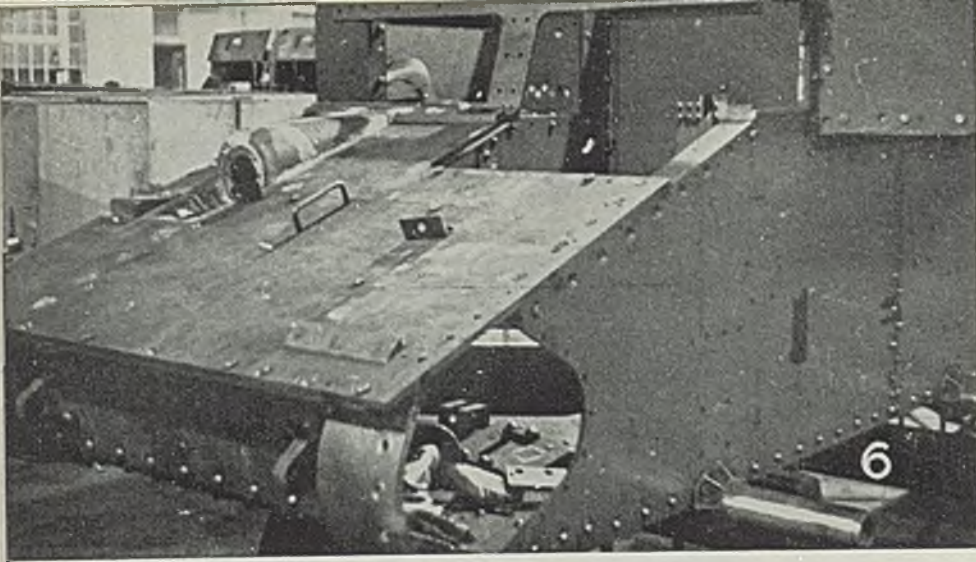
Here hull superstructure has been carried on up to turret supporting ring, and the transmission fixture has been removed. This is a front view of the hull
